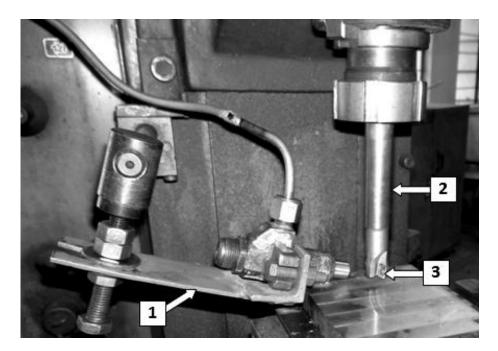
Fixtures for locating the fluid injector. (1.Fixture 2.Tool holder 3.Insert)
